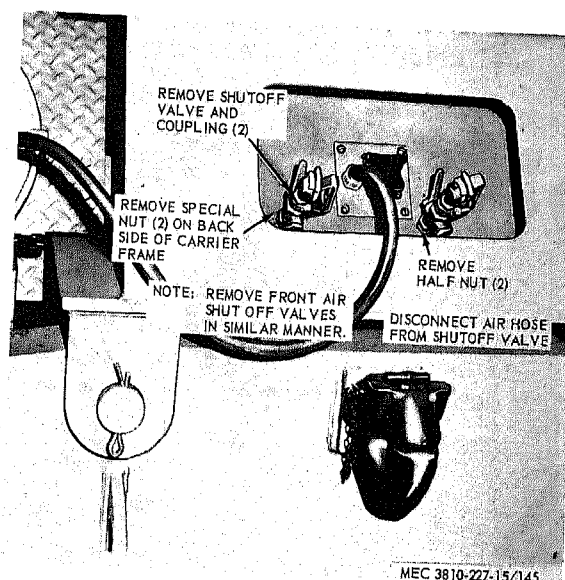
Rear air shutoff valves and air manifold, removal and installation.
